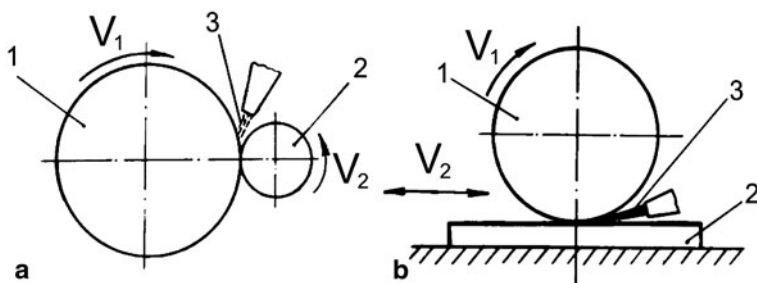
The scheme of MPT of a cylindrical and b plane surfaces: 1—strengthening tool; 2—treated component; 3—coolant
